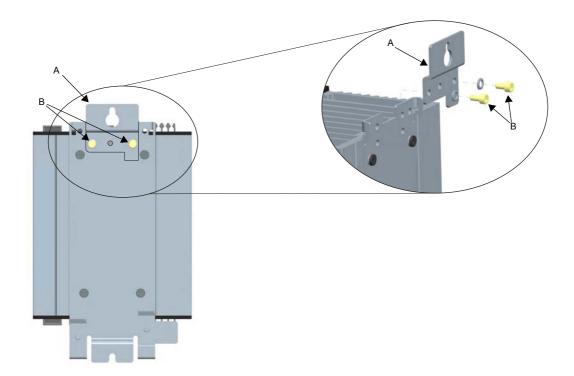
Fitting upper bulkhead mounting bracket (32A unit shown; 63A units similar)
